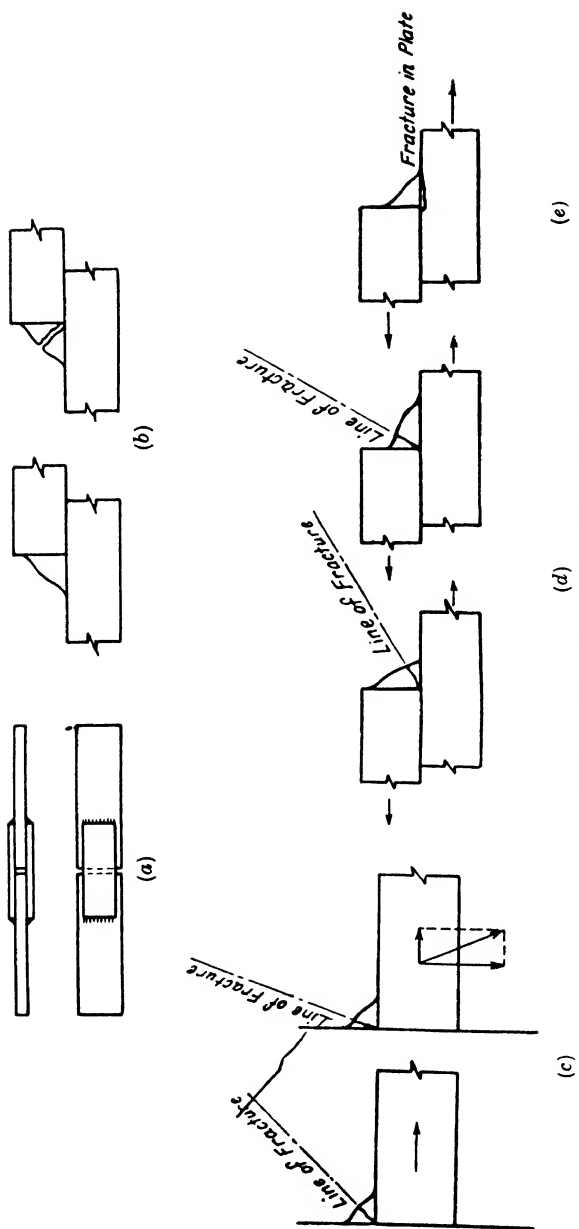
POSITION OF FRACTURE IN END FILLET WELDS
